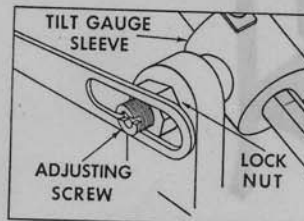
To eliminate play in the tilt gauge sleeve, remove lock knobs, loosen lock nut, and tighten adjusting screw.
